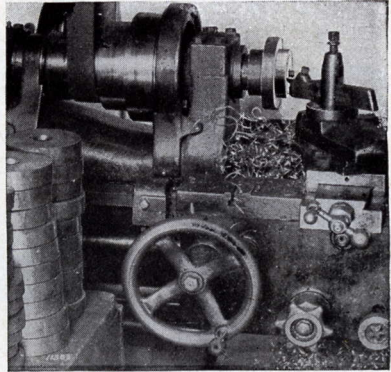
shows a steel disc held to the face plate of the lathe by a draw-in chuck attachment while being machined.
